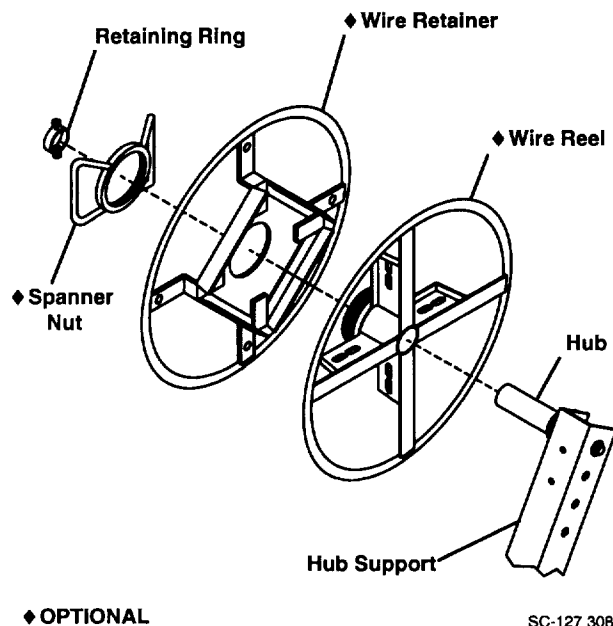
Optional Wire Reel And Reel-Type Wire Installation
